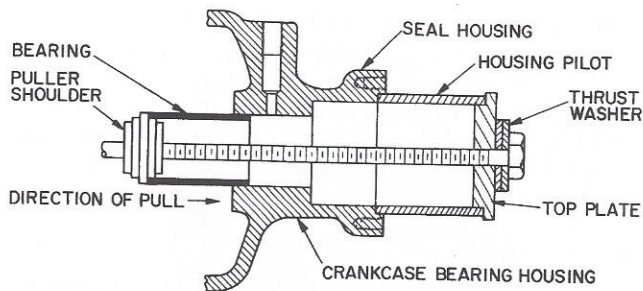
Seal-End Main Bearing (5F40, 60)
